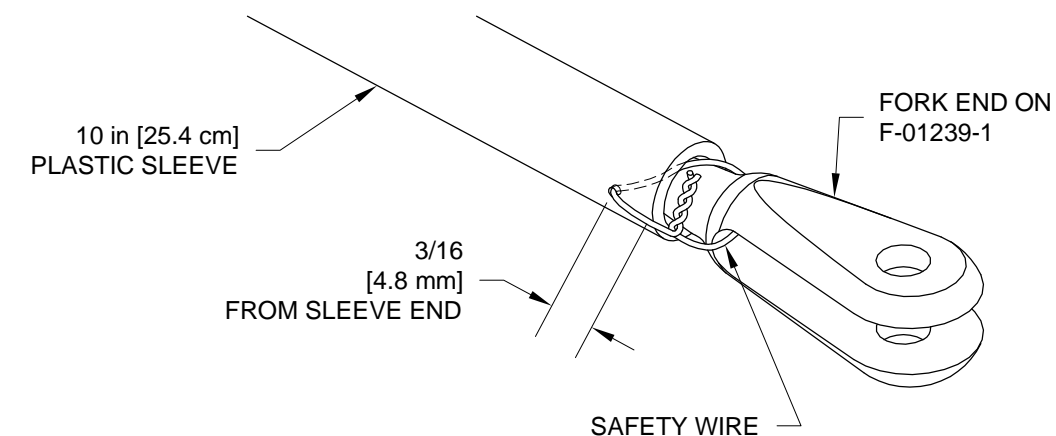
SAFETY WIRING THE RUDDER CABLE AFT PLASTIC SLEEVES
